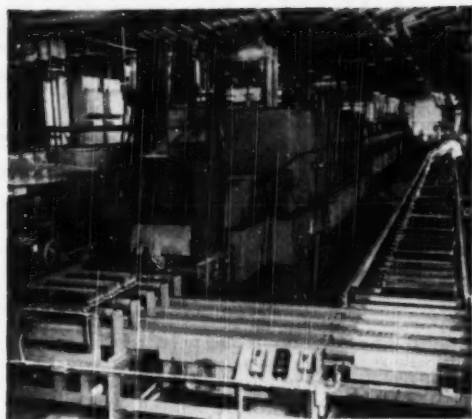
STEEL-FIN REFRIGERATOR CONDENSERS BEING FURNACE-BRAZED IN ROLLER-HEARTH-CONVEYER TYPE FURNACE WITH RETURN CONVEYER AND TRANSFER TABLES
